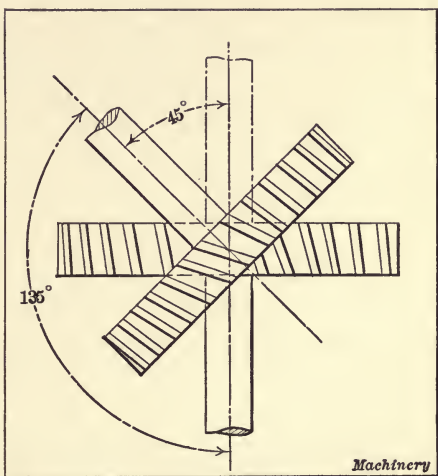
Diagrammatic View showing General Arrangement of Spiral Gearing with Shafts at a 45-degree Angle
